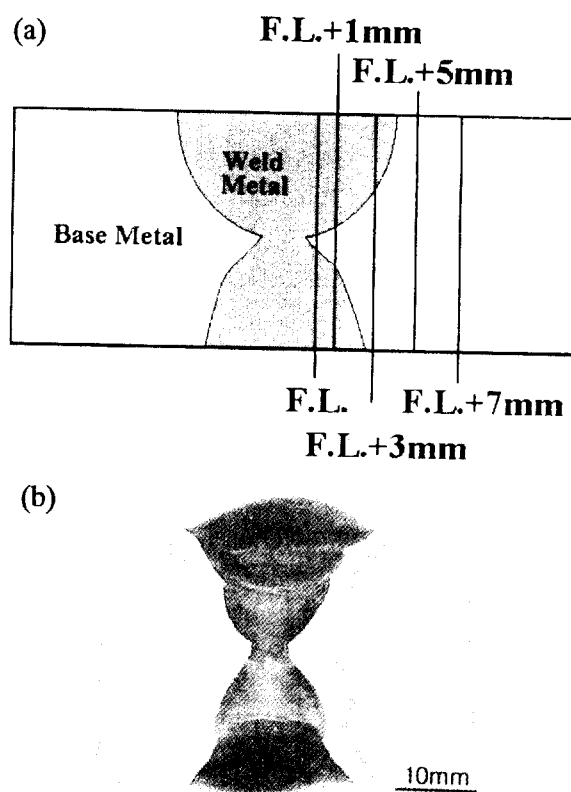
Notch locations of CTOD specimen with X-groove; (a) schematic diagram and (b) macro-view of actual weldment.
